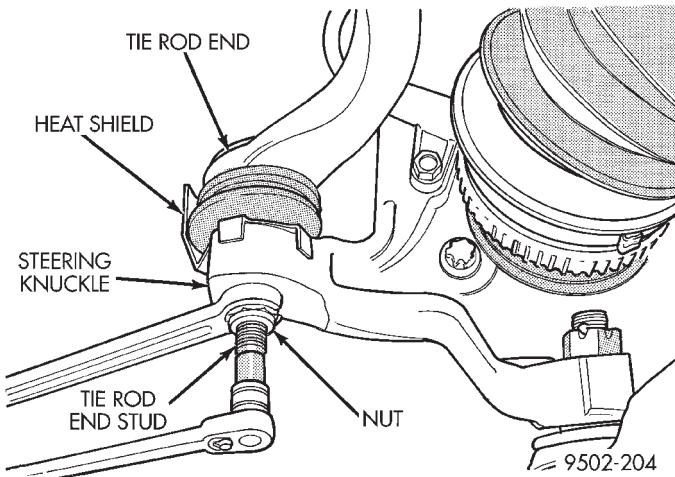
Tie Rod End Attaching Nut Removal/Installation
